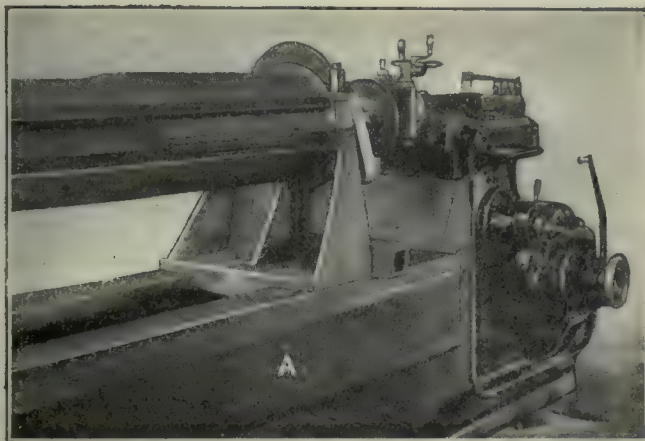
SPECIAL GUN-HOLDING FIXTURE FOR SWING SHAPING MACHINE
